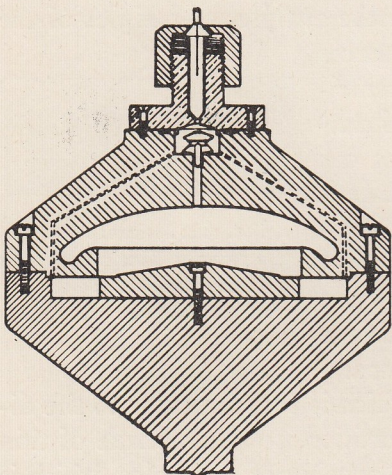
Section of rotor which permits division of cell contents while machine is spinning, as described on page 256. The rotor is made in two parts and fastened together with screws.
